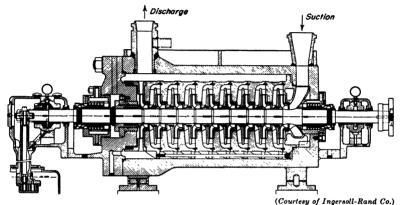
Multistage solid-case type of boiler feed pump.
